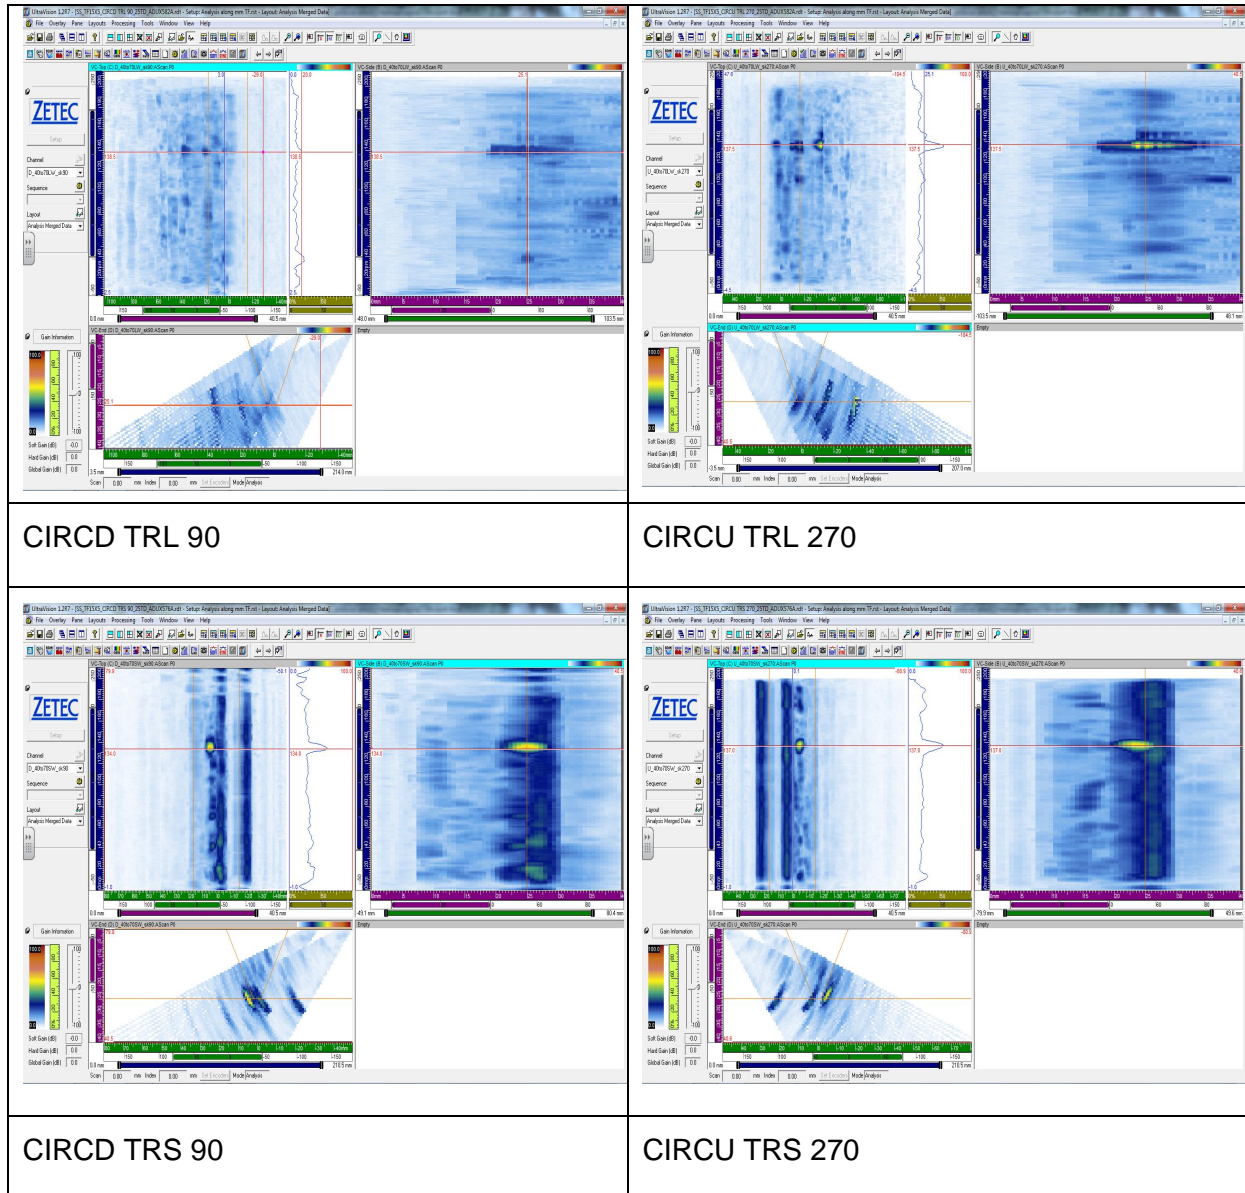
General views of weld MF scanned with technique PA-1.
